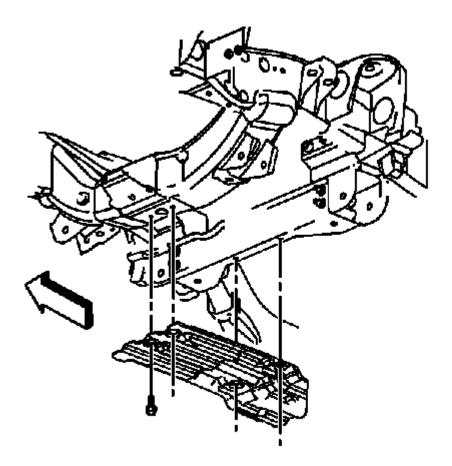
Identifying Oil Pan Skid Plate Courtesy of GENERAL MOTORS CORP.
